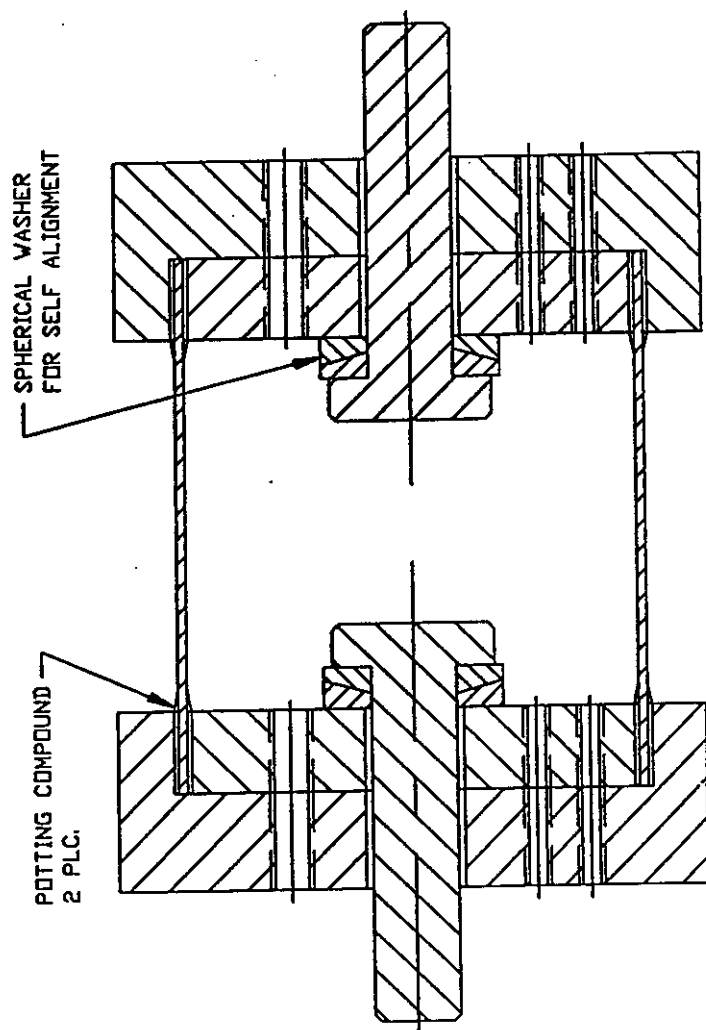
Illustration of Assembled Tension Fixture and Specimen
